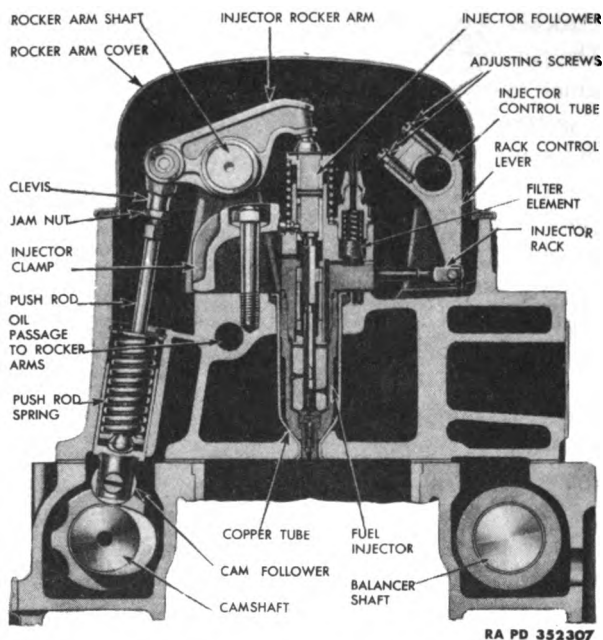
Single-unit Fuel Injector Mounted in Cylinder Head.
